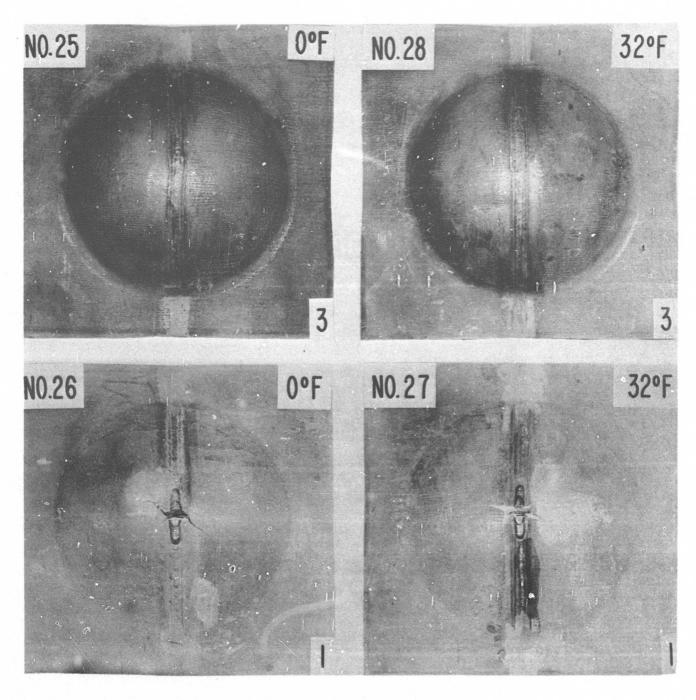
Explosion-bulge test fracture characteristics of manual Mil 26015 weldments. Bottom samples modified with crack-starter weld.
